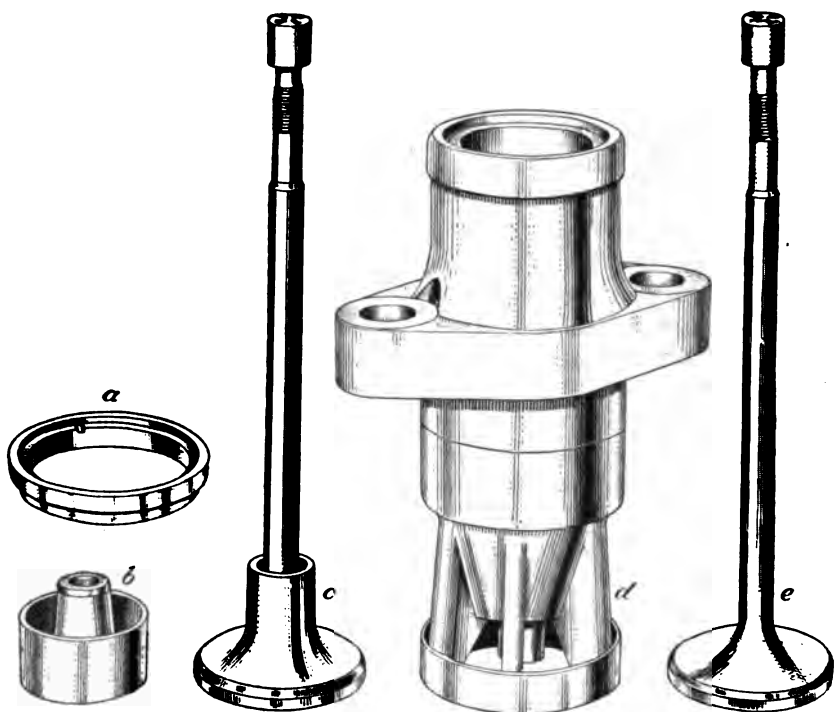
Valves and valve fittings. *a*, removable valve seat; *b*, spring cap; *c*, exhaust valve in stem; *d*, valve cage; *e*, air admission valve in stem.
